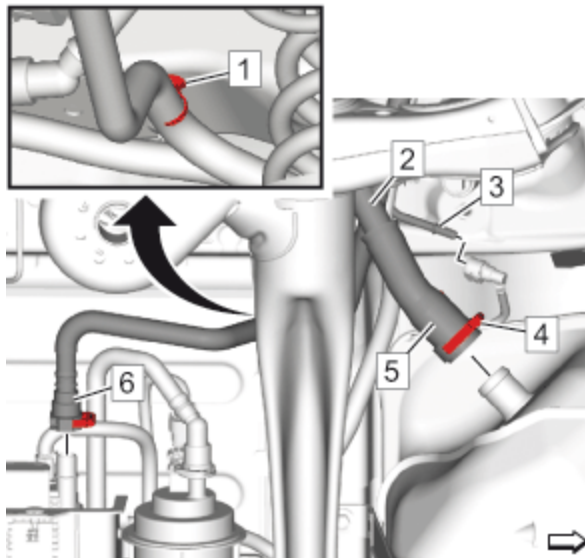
Evaporative Emission System Vacuum Leak Pump Filter Pipe, Fuel Tank Filler Hose, Vent Pipe, Clamp And Retainer
